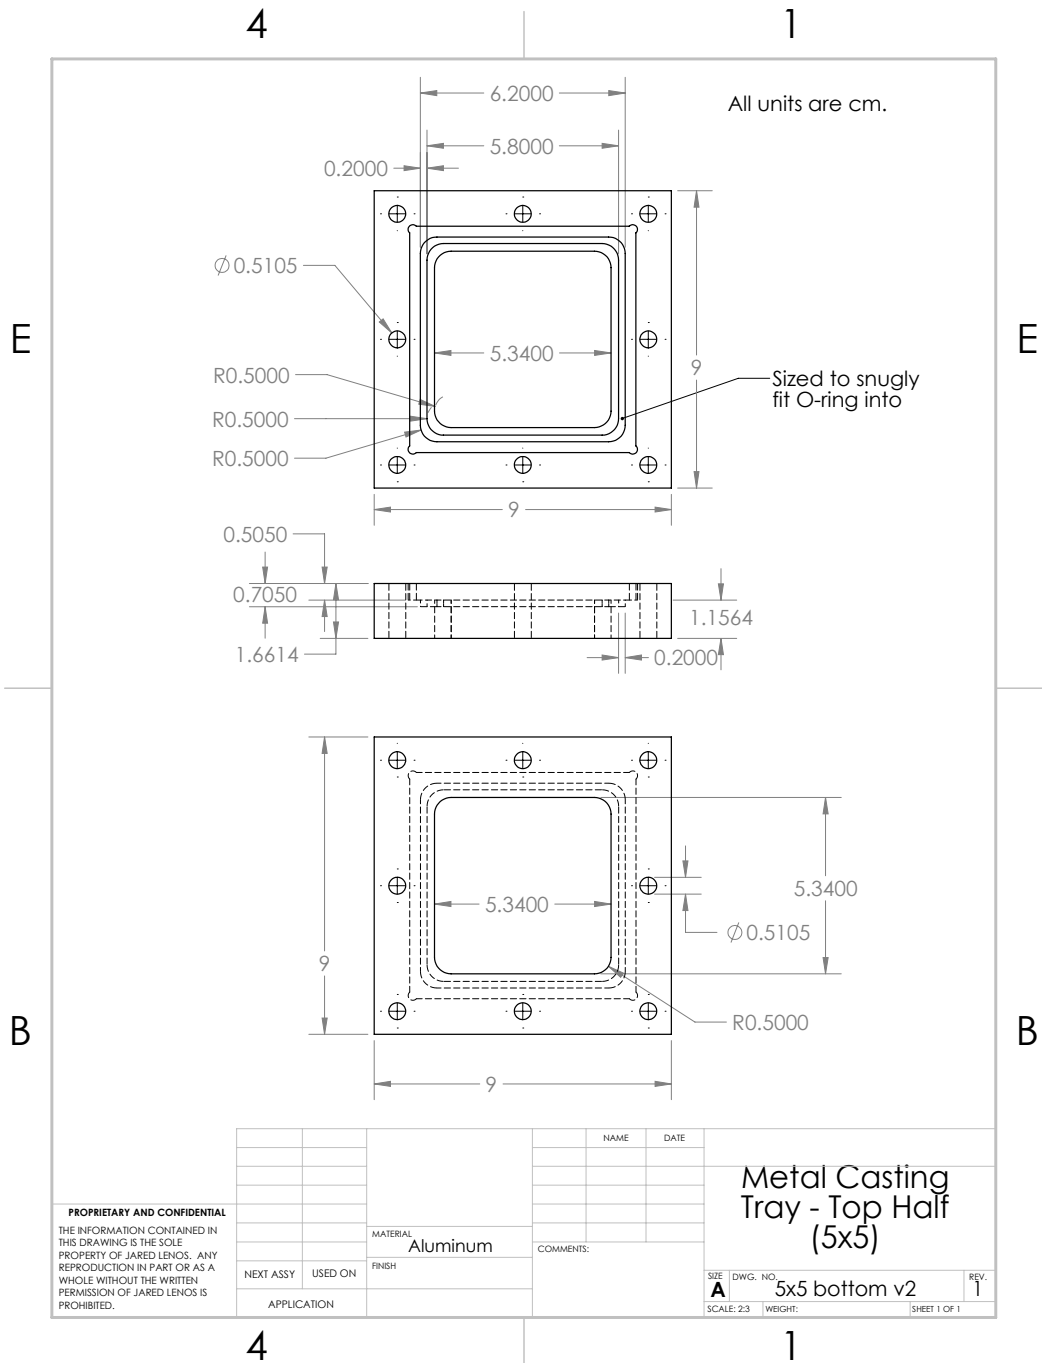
Solidworks design of the 28.5 cm<sup>2</sup> casting tray upper layer
